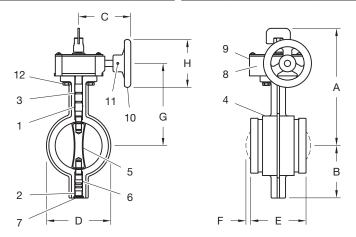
MODEL B303 GROOVED END BUTTERFLY VALVE WITH GEAR OPERATOR
